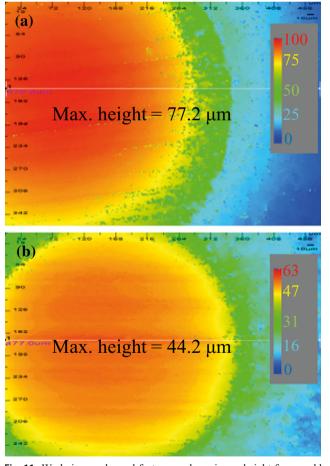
Workpiece embossed features and maximum height for a mold diameter  $d_m = 600 \ \mu m$  and b  $d_m = 394 \ \mu m$  with 50-µm-thick flyer
